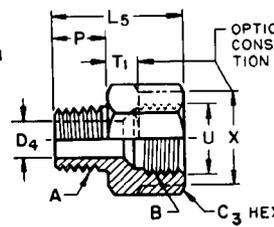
INTERNAL FLARE TO EXTERNAL PIPE ADAPTER
